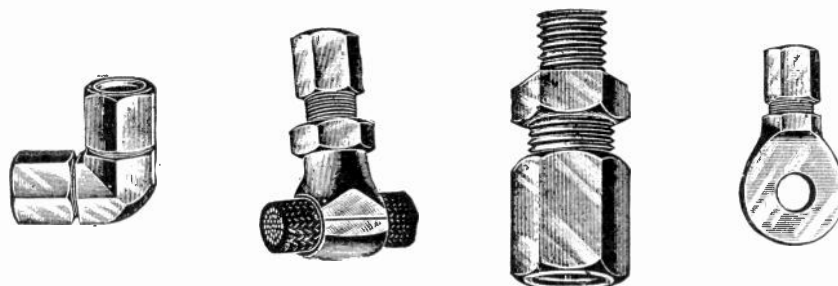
Several styles of solderless connectors used for splicing cables. These connectors grip the cable very securely when their nuts are tightened with a wrench.
